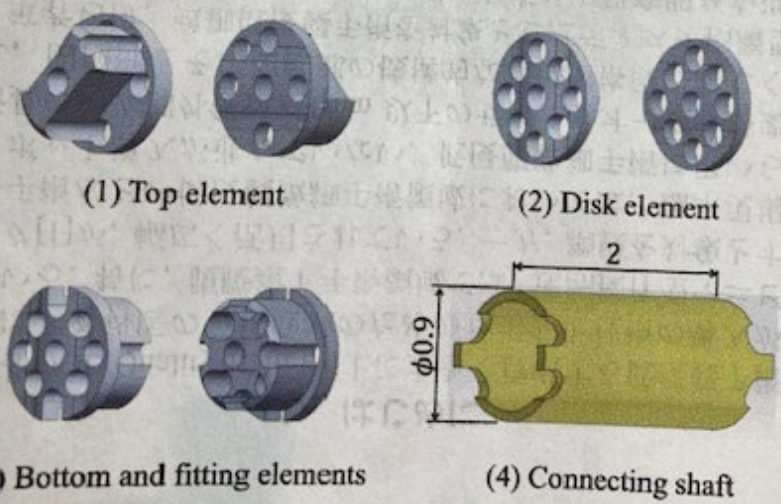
Top, bottom, fitting and disk elements, and connecting shaft
